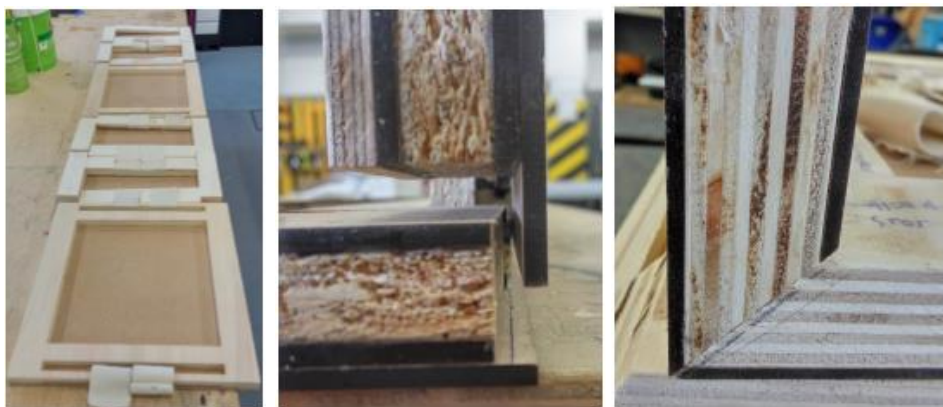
Three versions of the Part X prototype (sourced from team)
